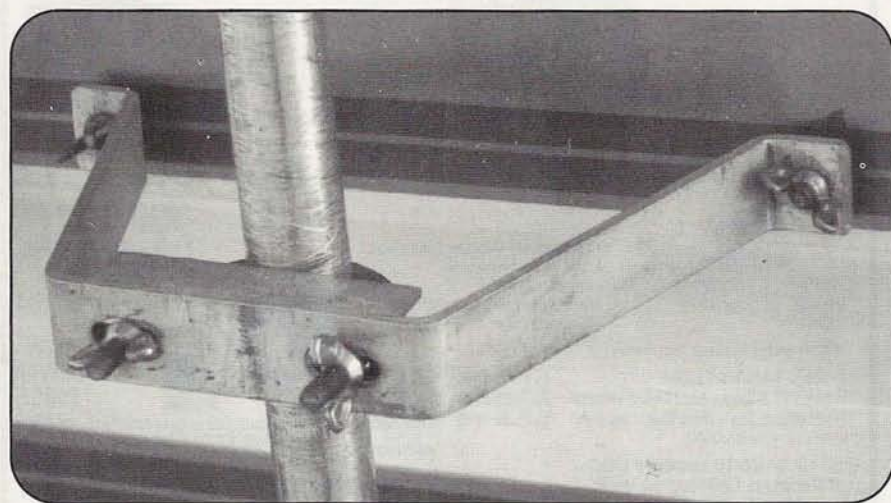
Photo D. Four-inch wall mounts can be used for a serious installation—attach them to a door and you can mount a mast for a beam (see Photo E).
